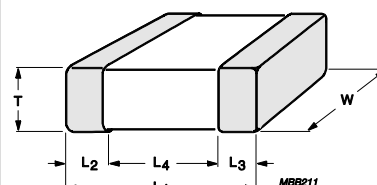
Surface mounted multilayer ceramic capacitor dimension
